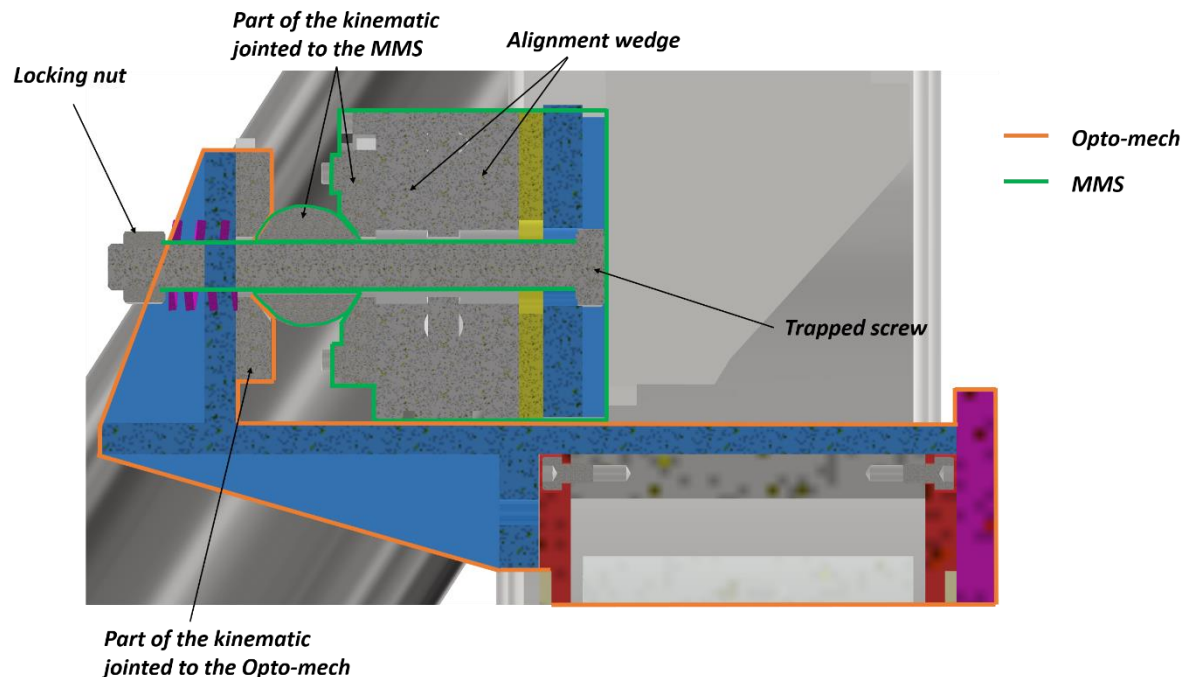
section view of one kinematic mount on the front surface of a subsystem (Schmidt Plate in this case). The fixing screw is trapped in the MSS, and it is locked by a nut at the opposite edge of the screw. Bordered in green, the parts mechanically jointed to the MSS (fixed), bordered in orange the parts jointed to the subsystem (movable). The nut is positioned by an operator when all the 3 fixing screws are inside their kinematics.
